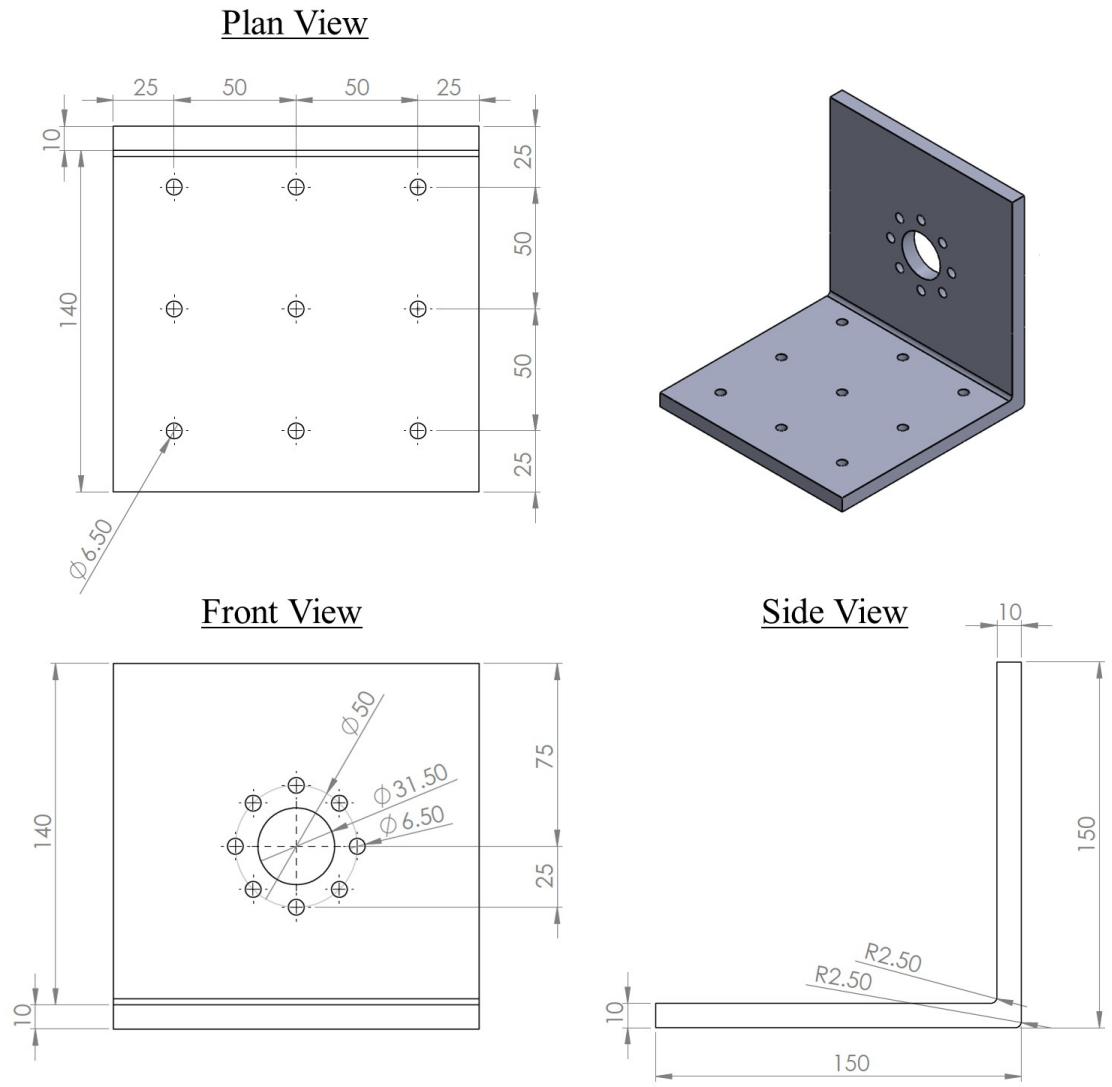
Dimensions of the bracket, from the front, side and plan view.
